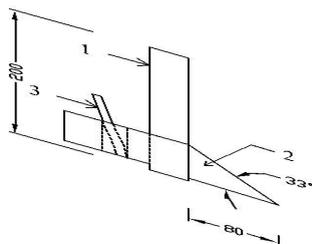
Isometric view of shoe type furrow opener of developed bullock drawn dry paddy seed cum fertilizer drill
